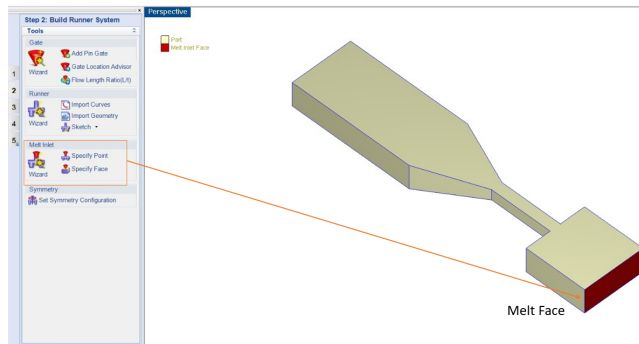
Melt inlet face defined for the insert C in the Moldex3D designer environment.
